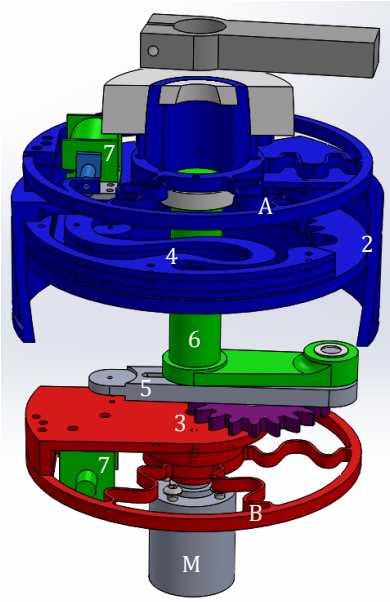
Exploded, and partially cross-sectional, view of the SM-VSA, with the same labels as in Figure 8. The enclosing frame of the rotor (2), and the planet carrier (3) to which the planet gear of the gear mechanism is connected are now shown more explicitly.
